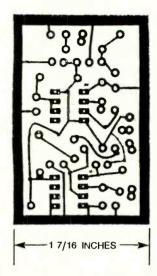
Although the circuit could have been hard-wired on a perfboard, the author chose to assemble his unit on a printed-circuit board.
